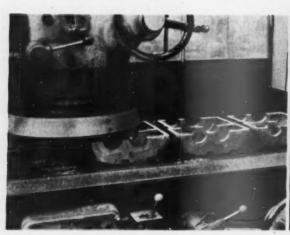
Machining gearbox joint faces on a Kendall and Gent vertical mill
